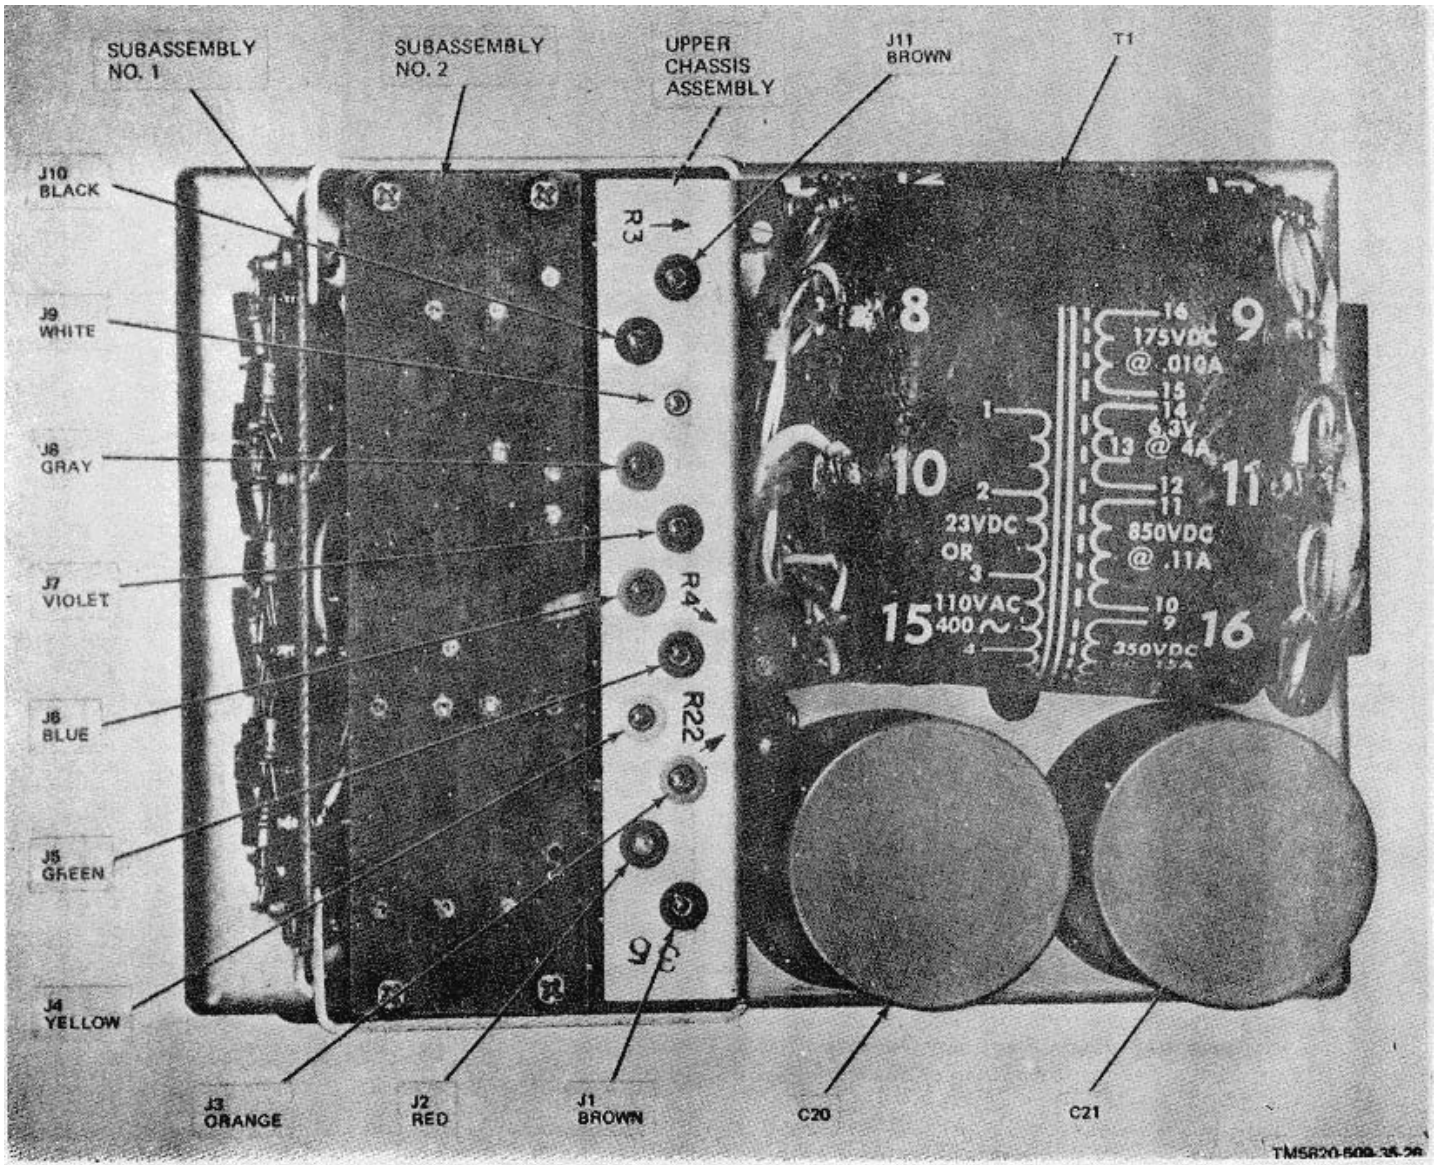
Power Supply PP-3518/PRC-47 (A8A5), Top View, Cover Removed, Location of Subassemblies and Test Points.
